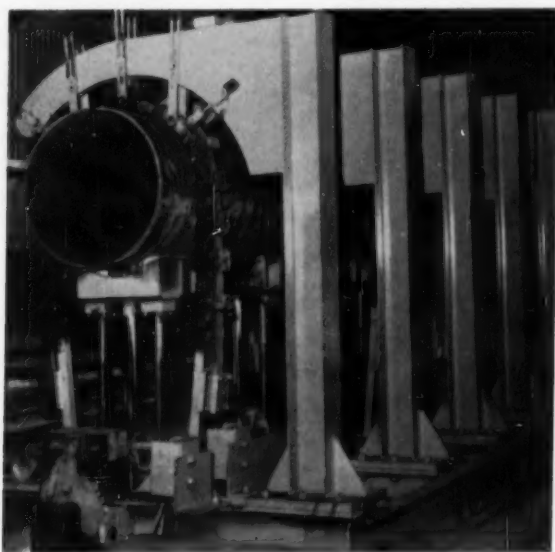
Tack-welding jig for submerged-arc-welded line pipe, in use at the Geneva Works, Provo, Utah. After forming, the "can" as the formed pipe is called, is tack welded in the jig shown.
